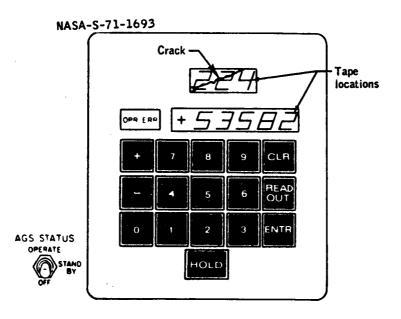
Locations of crack and tape on data entry and display assembly.
